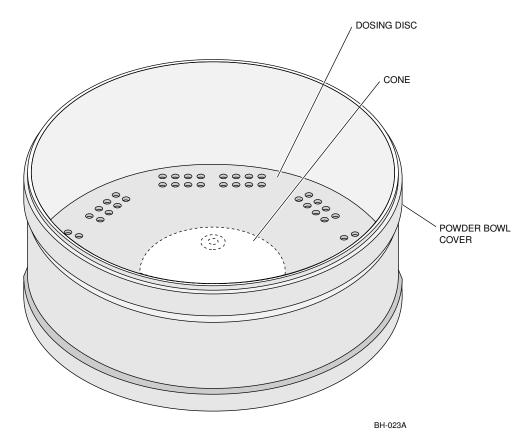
Dosing Disc, Cone, and Tamping Ring inside Powder Bowl
